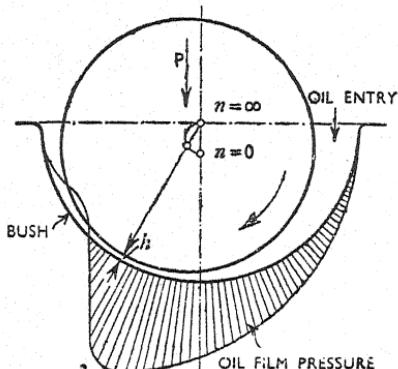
Oil Film Pressure Diagram of a Journal Bearing with a Smooth Brass
